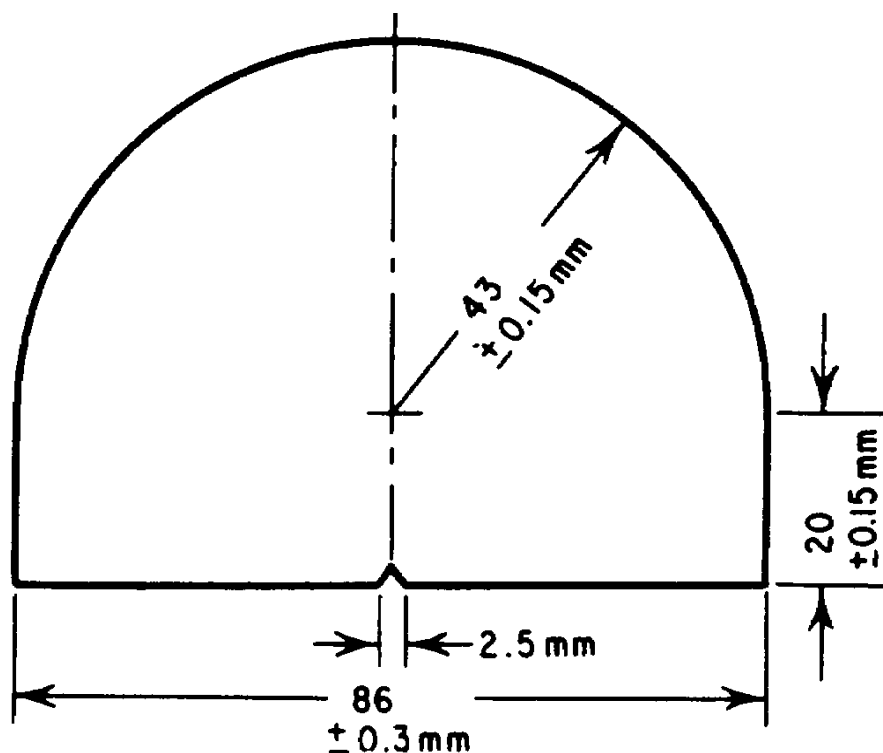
Specimen for cross-direction internal tear testing of paperboard.
